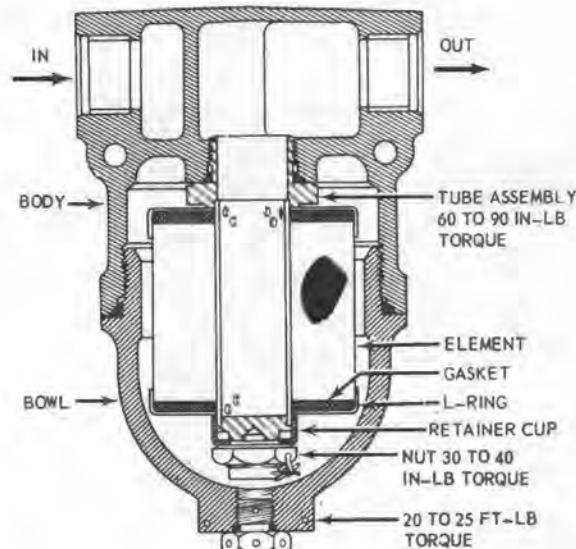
Fuel strainer cross-section — UH-1A thru Serial No. 58-3047
